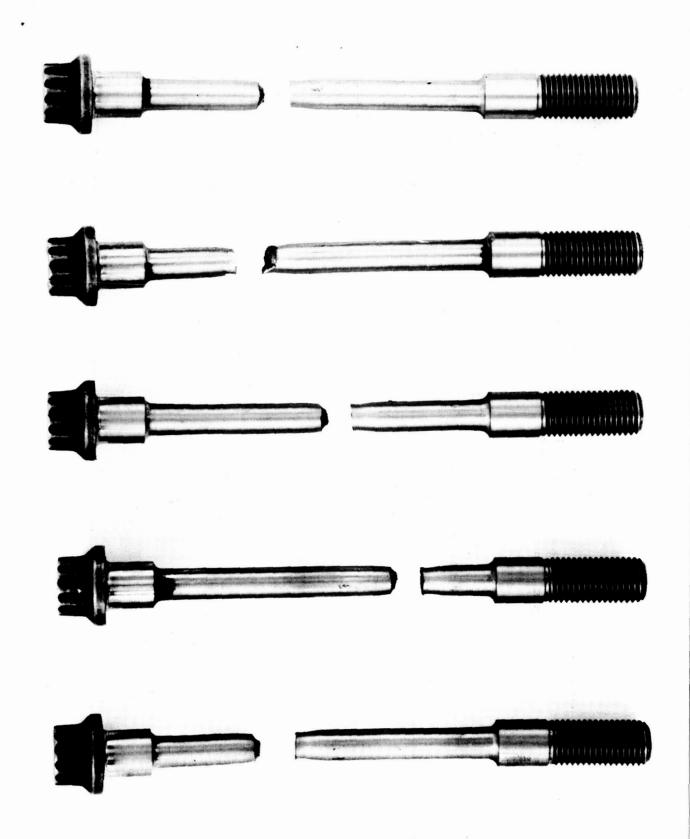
E A-286 REDUCED SHANK BOLT SPECIMENS TESTED AT -423°F (-253°C)
